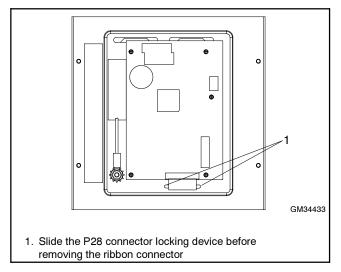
RSA Annunciator Panel and RSA Circuit Board (Back View of Front Panel)
